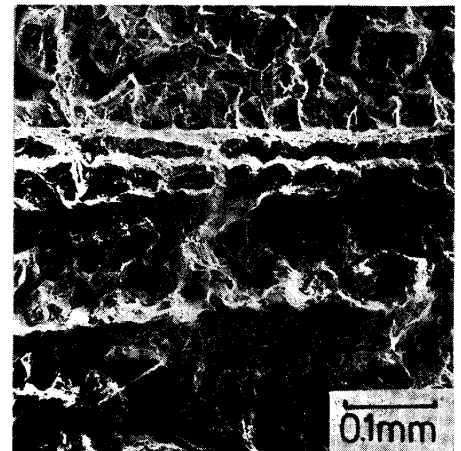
SEM photograph of tensile fracture surface of SUS316L casting tested at 4K.
